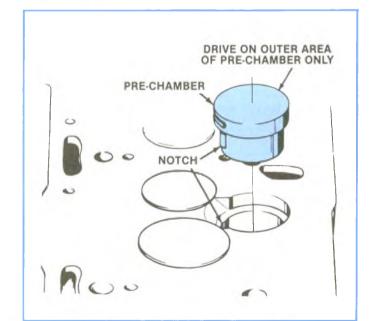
, Pre-Chamber Installation in Cylinder Head.
